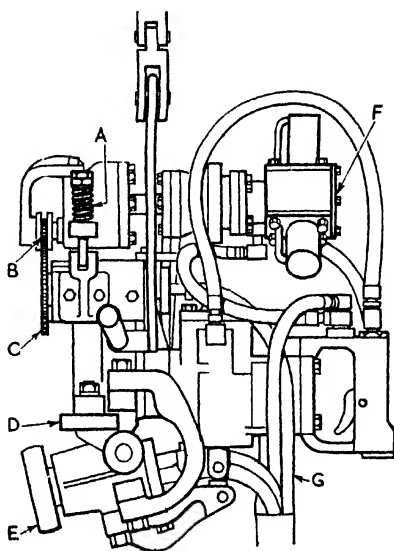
SKETCH SHOWING THE MAIN FEATURES OF THE ROLLER SPOT WELDER
